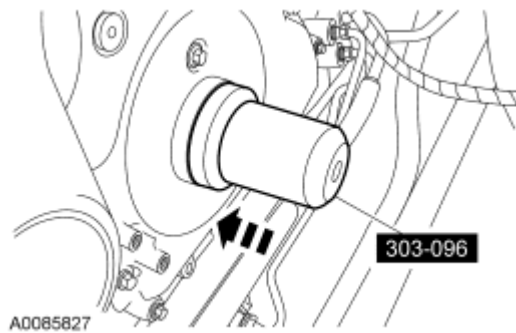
Installing Crankshaft Front Oil Seal Using Special Tool (303-096)
